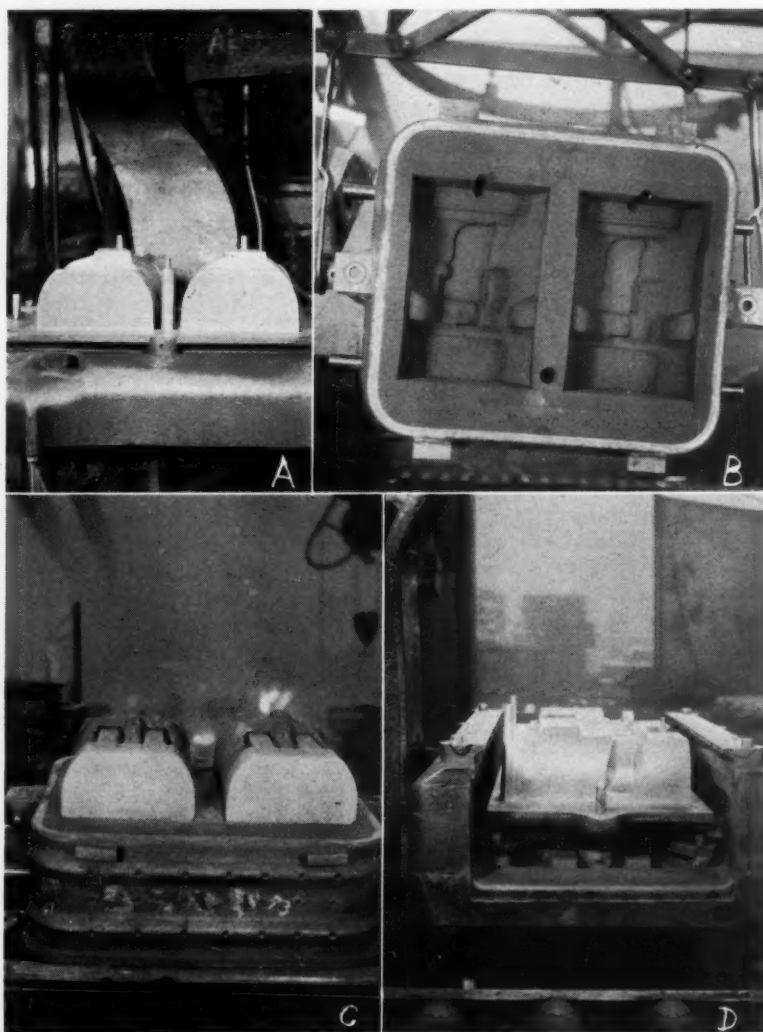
(A) Flask and machine of Fig. 4 used in producing two cylinders per mold. Note depth of screen sand between cylinders. (B) Cope of pattern ready for closing. (C) Drag mold cored up ready for cope. Note metal section and pocket between cylinders. (D) End view of pattern. Note rugged equipment.
